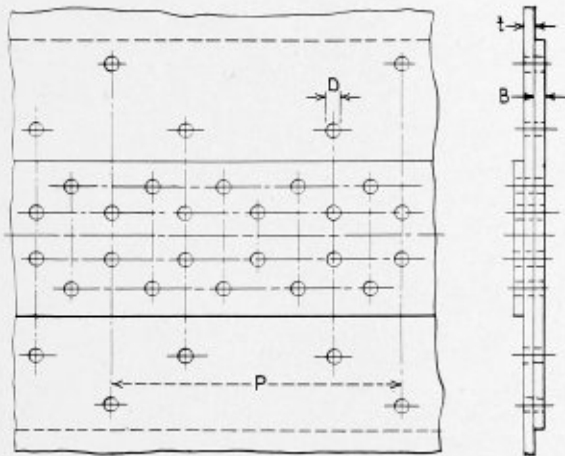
Quadruple-riveted butt joint with inside and outside welts
